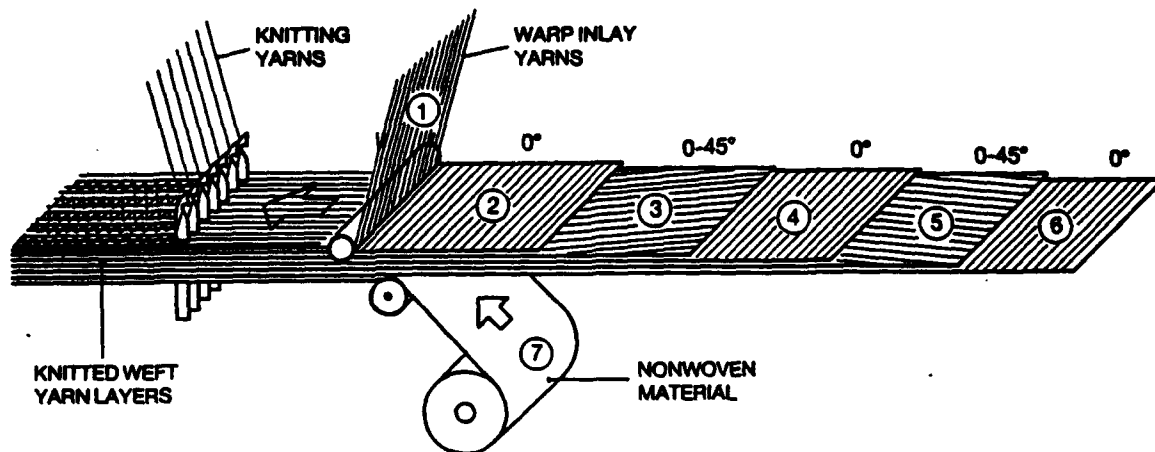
LIBA MULTI-AXIAL WARP KNITTING MACHINE
